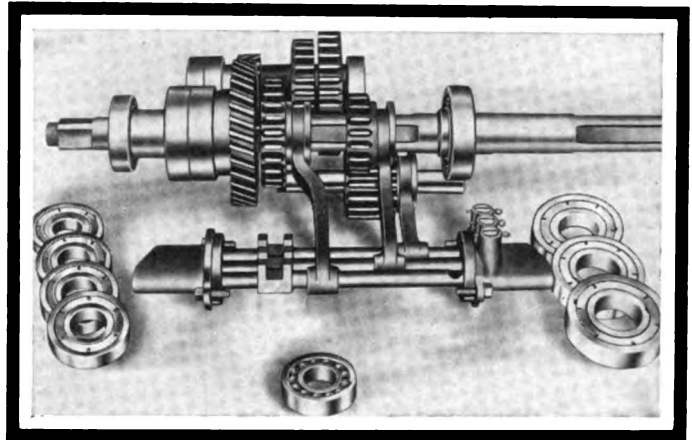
Assembly of Knox gearset showing annular ball bearings
